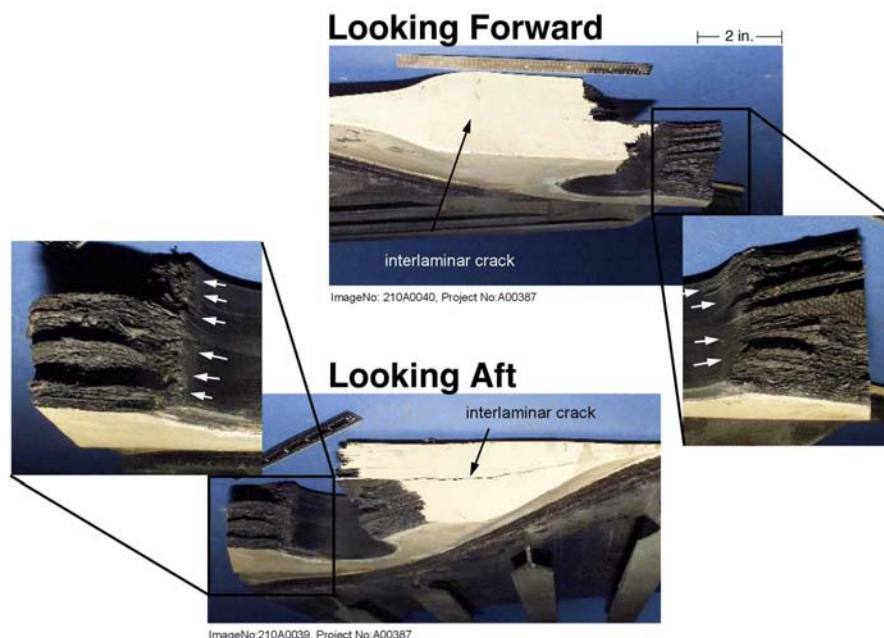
Right aft lug translaminar fractures (pictured from below the lug).
